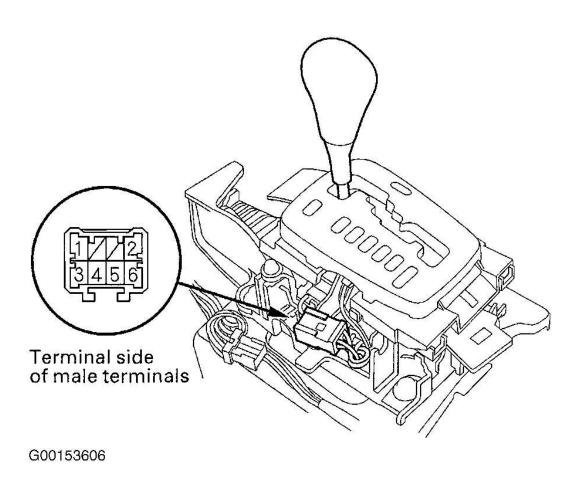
Identifying A/T Shift Switch Assembly Connector Terminals Courtesy of AMERICAN HONDA MOTOR CO., INC.
